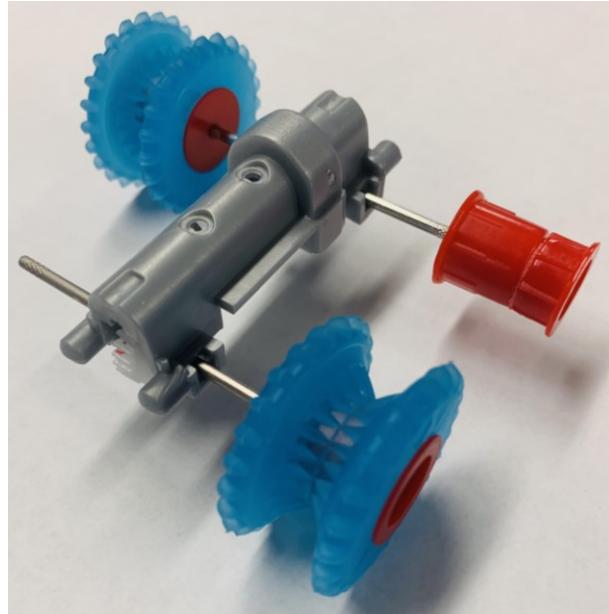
Rear and Front Wheel Assembly (partial assembly to help describe the individual components)
